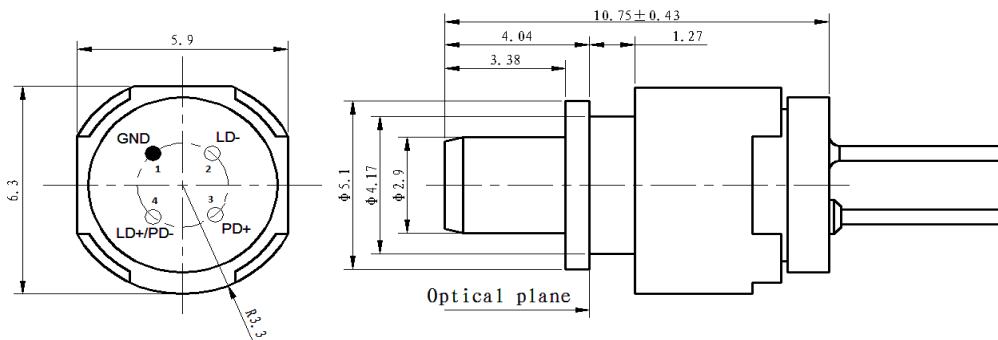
Package Outline (dimensions in mm) and pin/barrel orientation.
